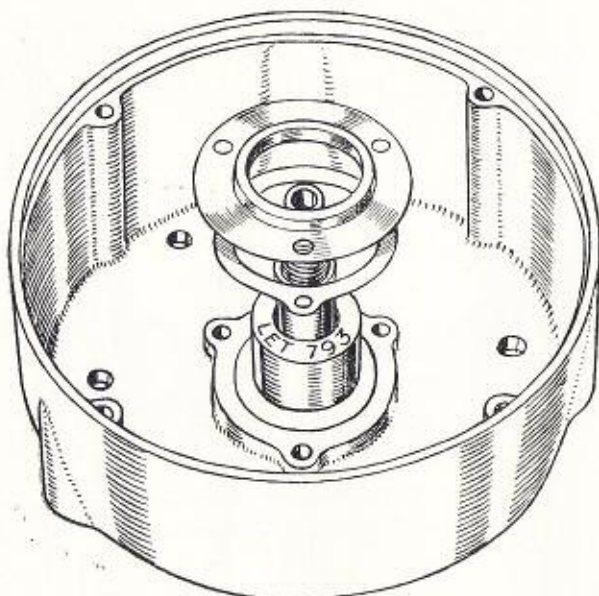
The Flywheel Housing Oil Seal is centralised by the use of Tool LET.793.
